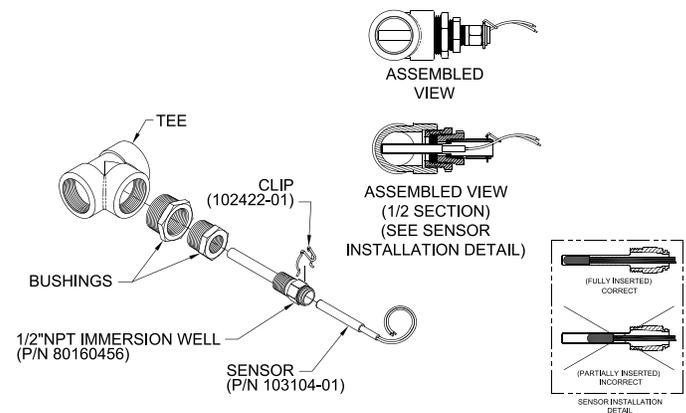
Alternate “Immersion” type Header Sensor Installation Detail
